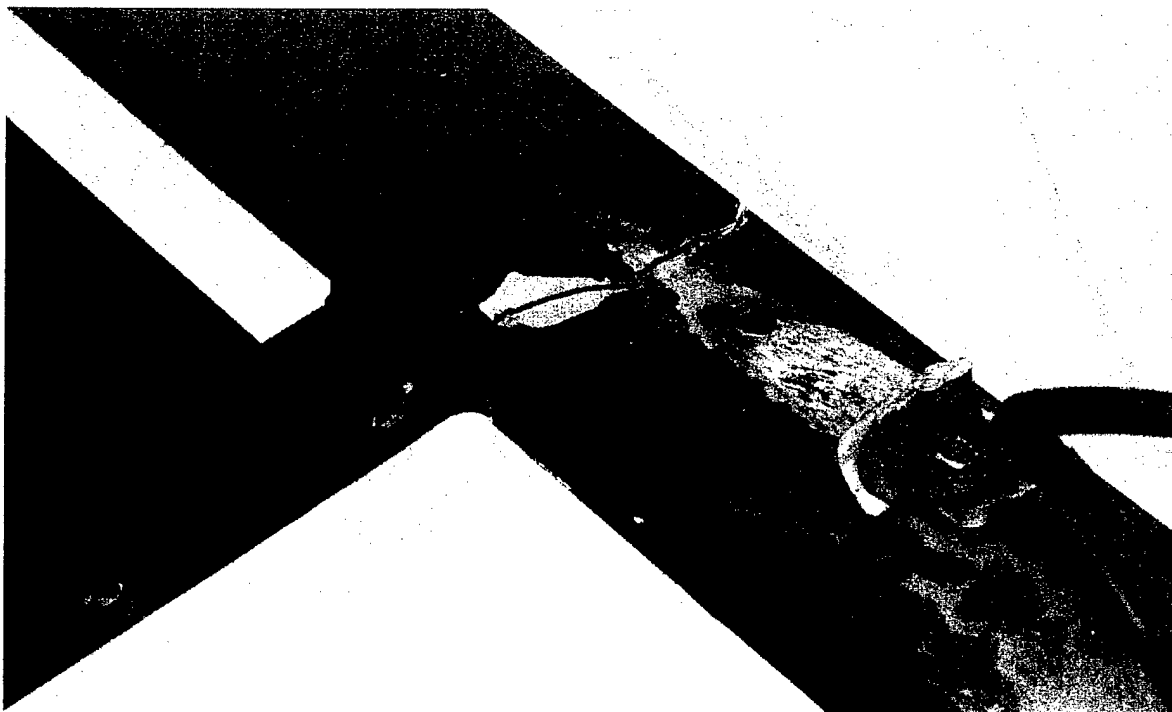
XM21 Baseplate Fatigue Fracture
